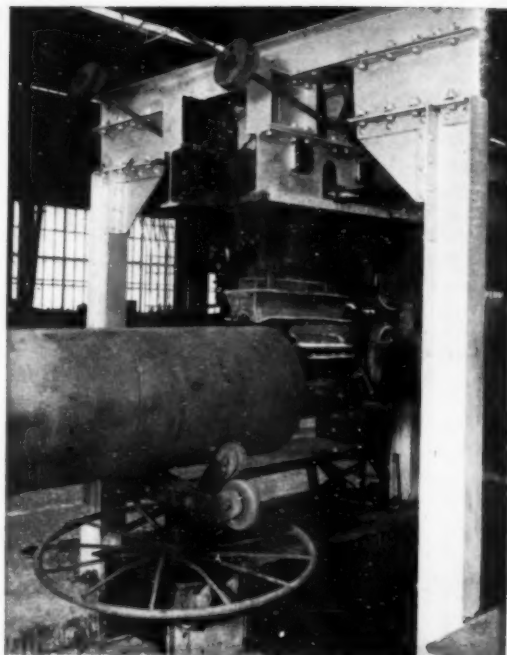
Set up for welding large diameter steel tubes at the works of Clayton, Son & Co., Ltd.
